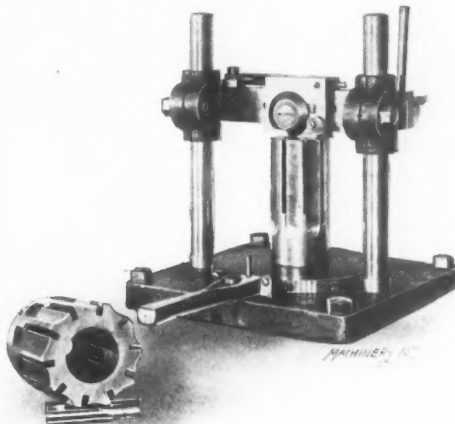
Fixture for Graduating on the End of Reamer Bodies.
